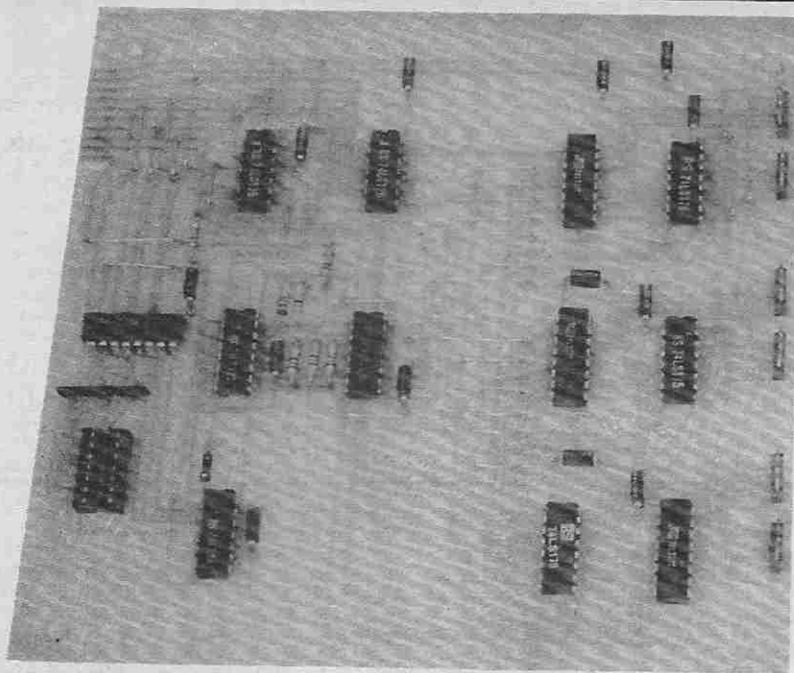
Interface board overlay. The connection to the computer port will depend on your particular machine.
